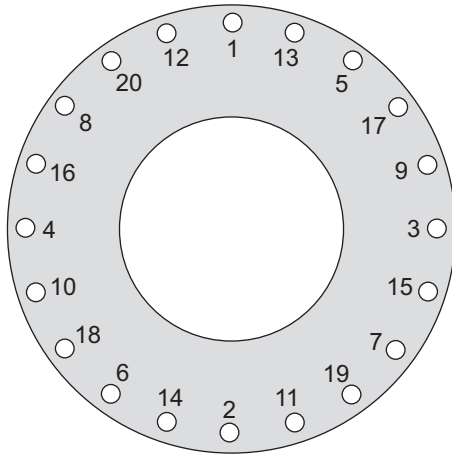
Tighten bolts diagonally / 20 bolts, spacing 18°
